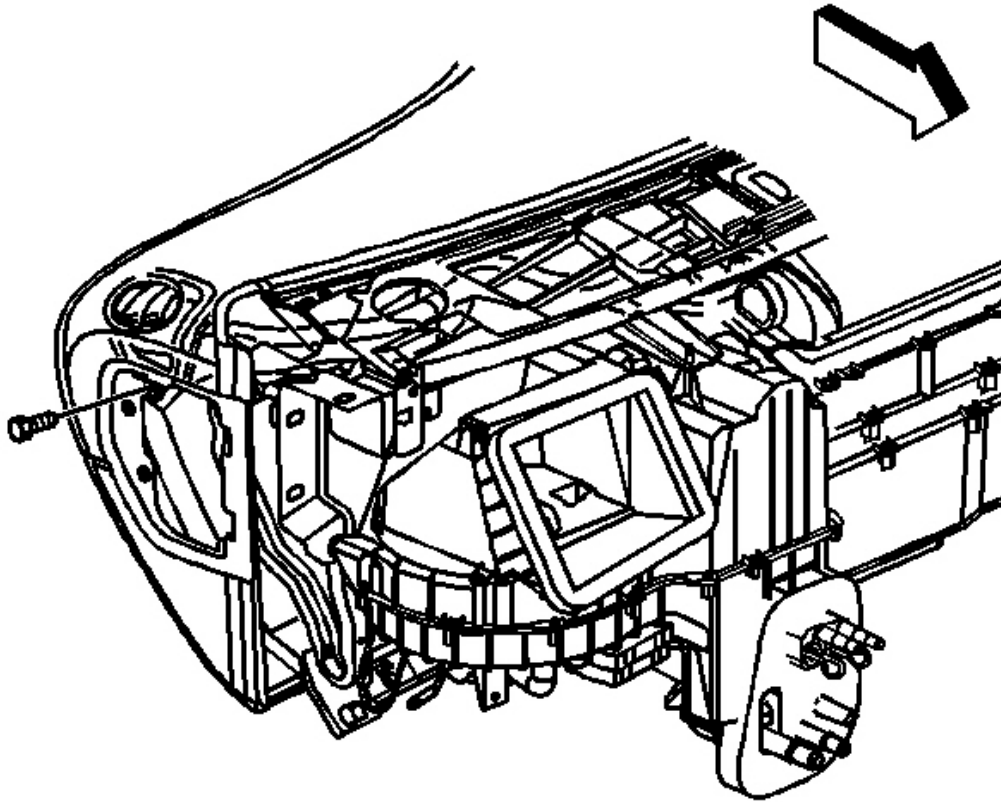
Locating Lower Instrument Panel Bolts
